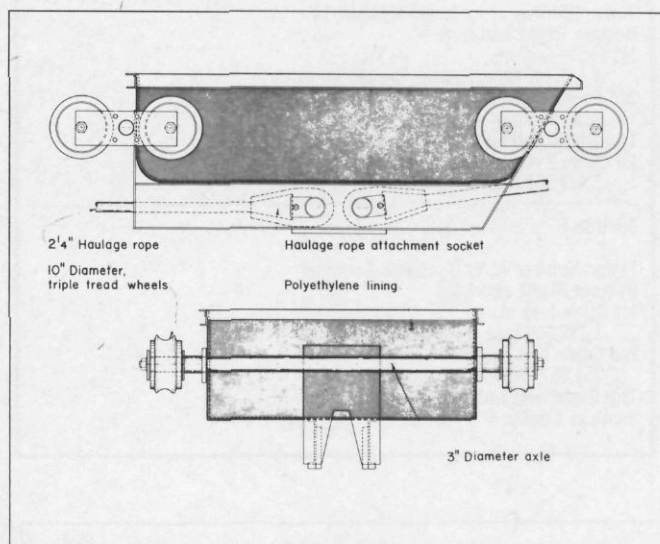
Cross sections of a 40-cu.-ft tramcar.
